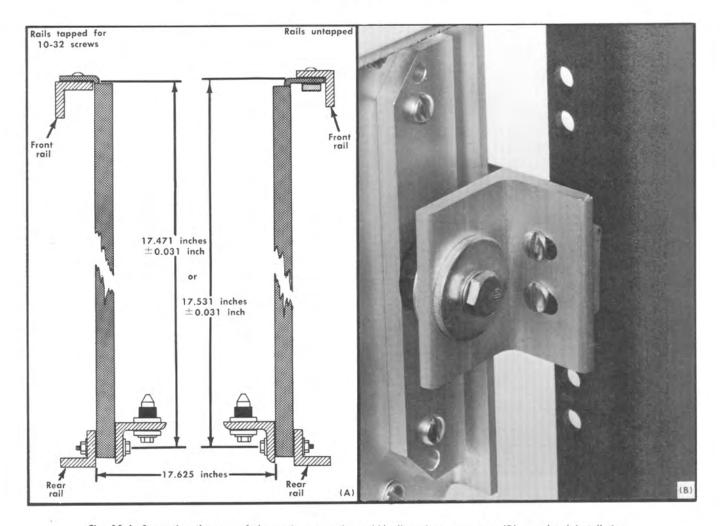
Supporting the rear of the stationary sections: (A) dimensions necessary, (B) completed installation.
